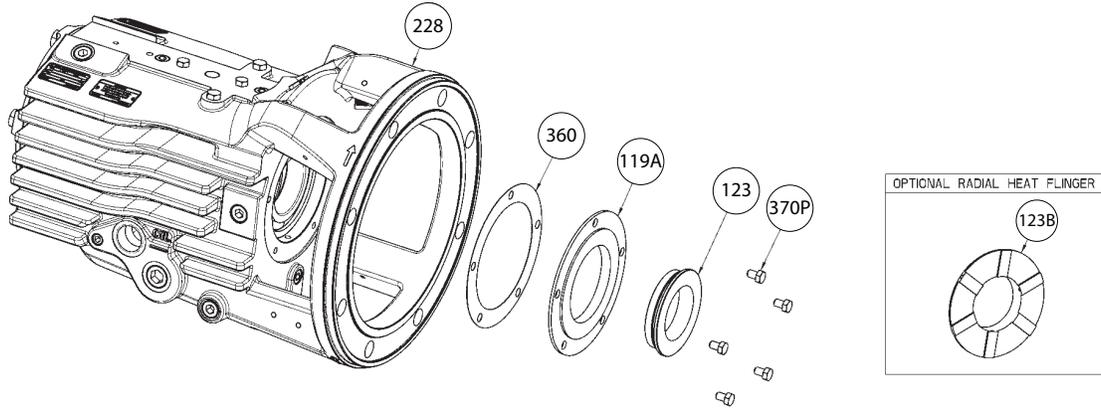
Radial bearing isolator or optional radial heat flinger removal
